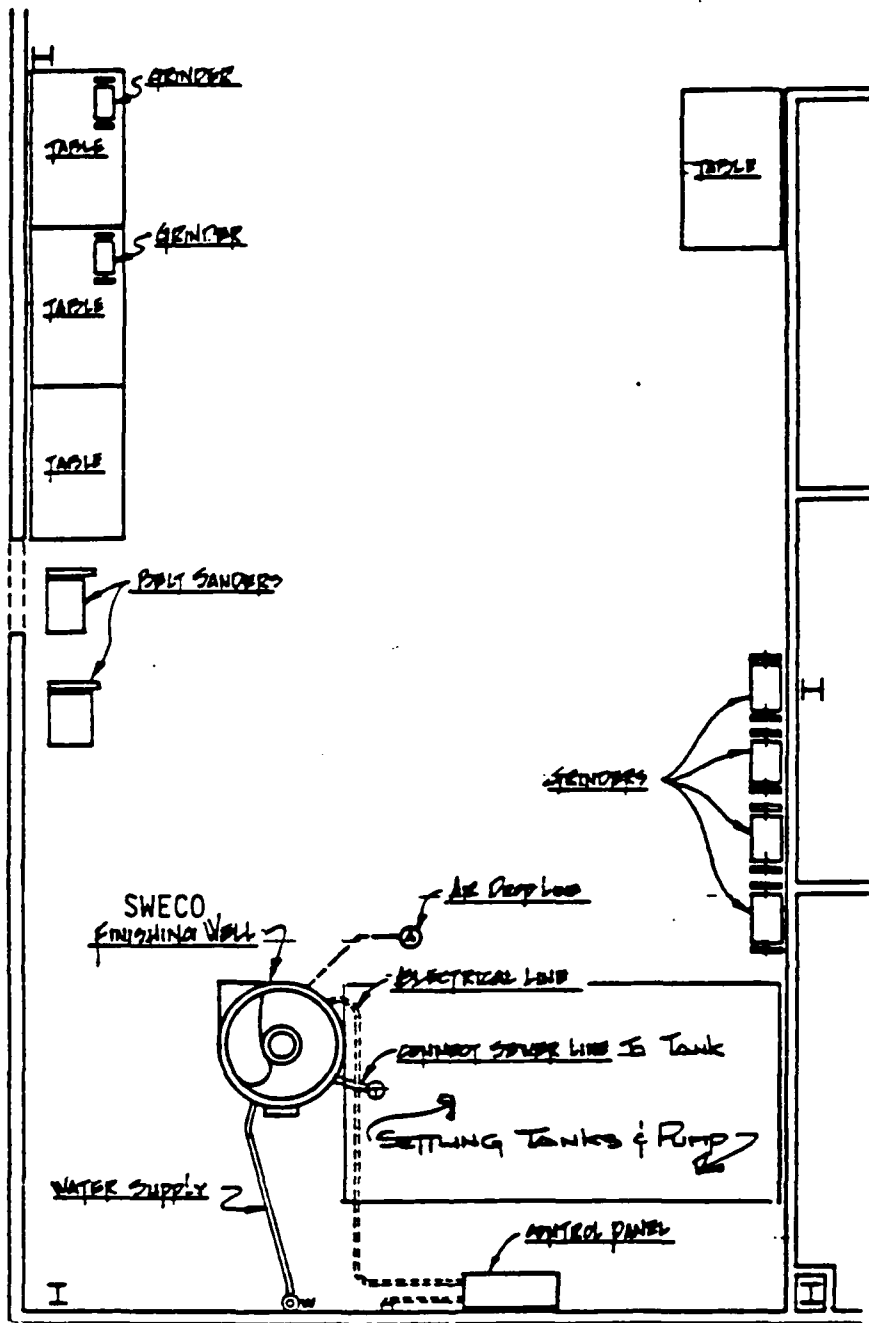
IMPROVED TOOL AND MODEL SHOP LAYOUT
